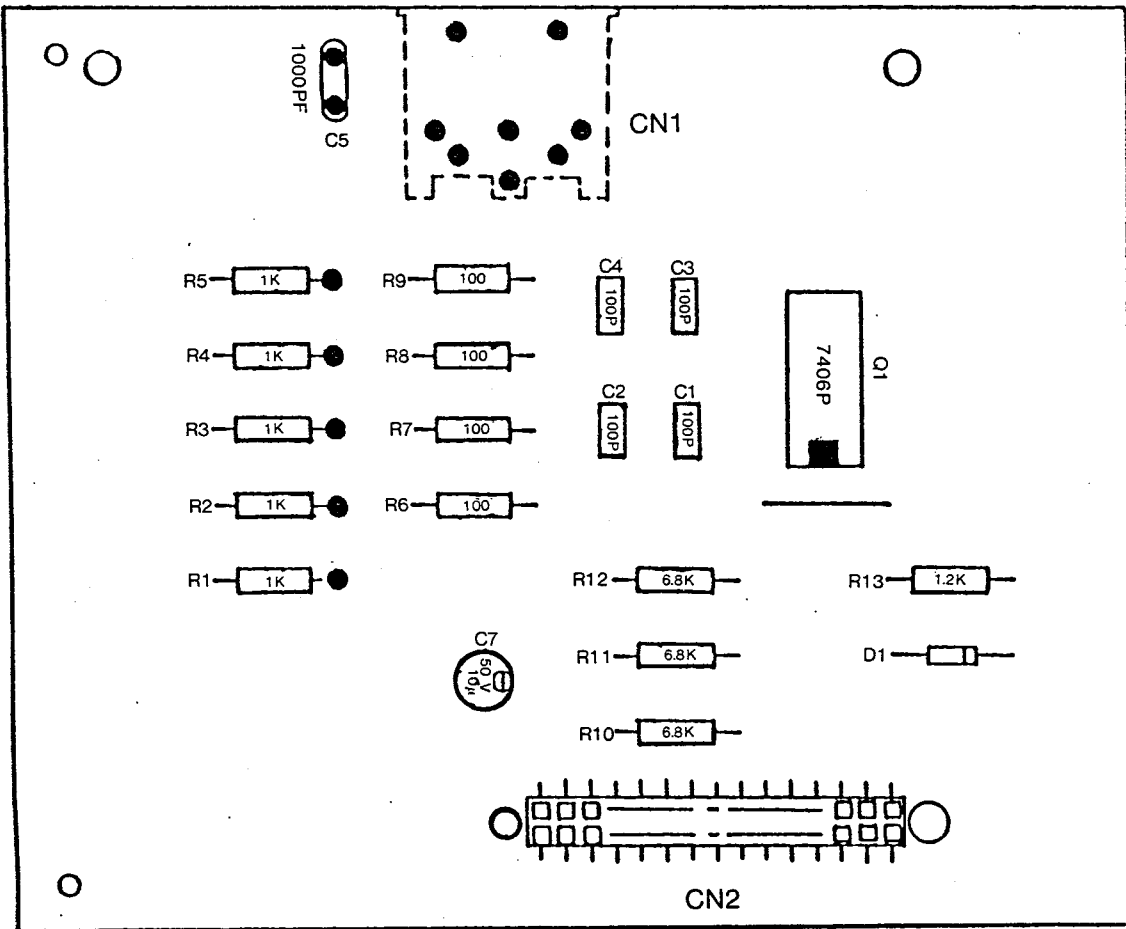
CDR Printed-Circuit Board (4YA4042-1056) 1/2 (2/2)
